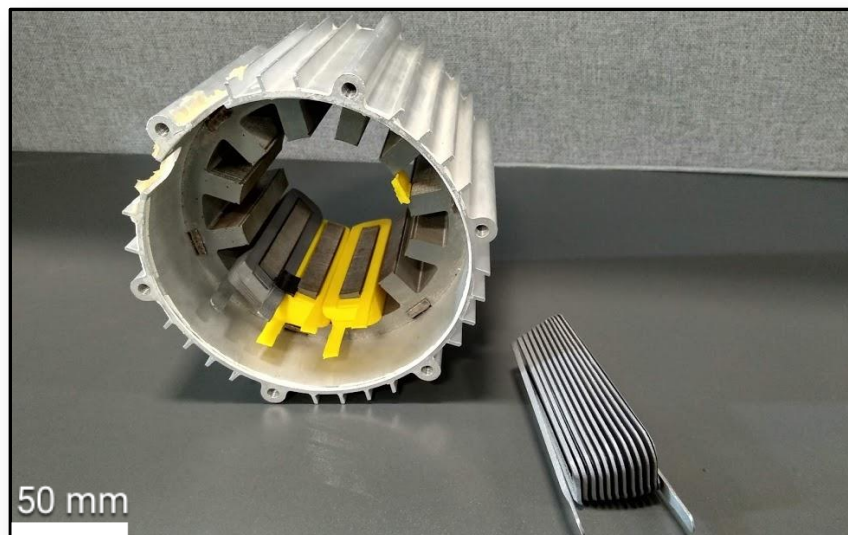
Assembly of 3D printed windings in the electric motor.
